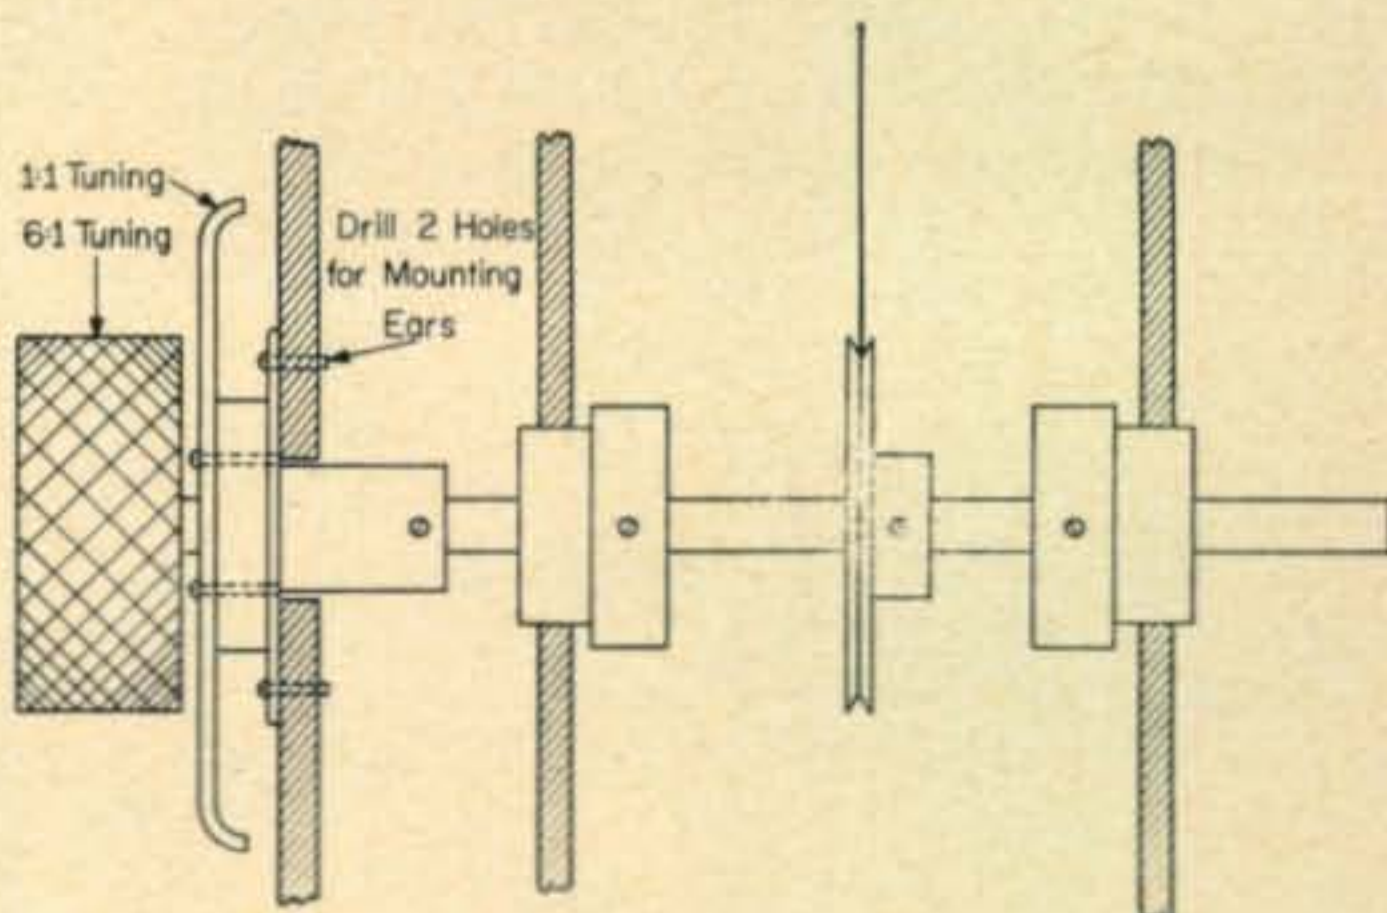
Modified drive assembly with the 6:1 planetary drive added. The set screws on the shaft lock bearings are loosened to move the shaft back.
